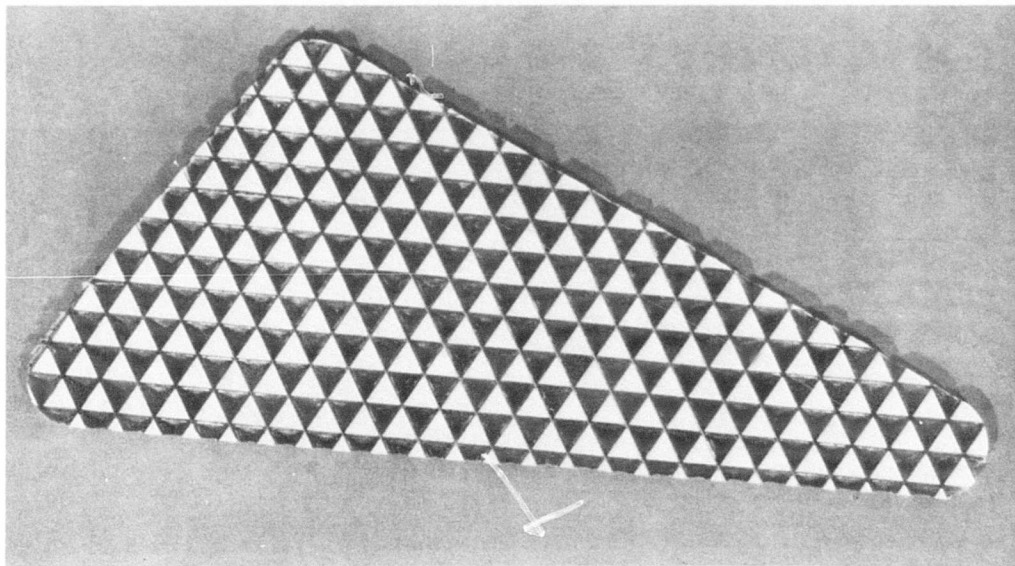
"Tetra-Core" Bell Crank Face Sheet Cut to Shape.
